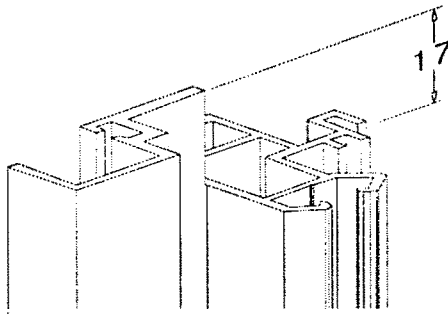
Processing drawing of corner finishing member ("F" details)
